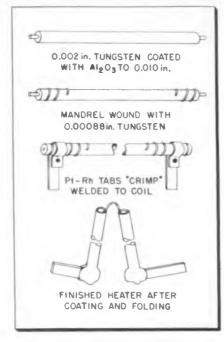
26.5 volt heater made by crimp welding to reduce heat transfer to coil wire
